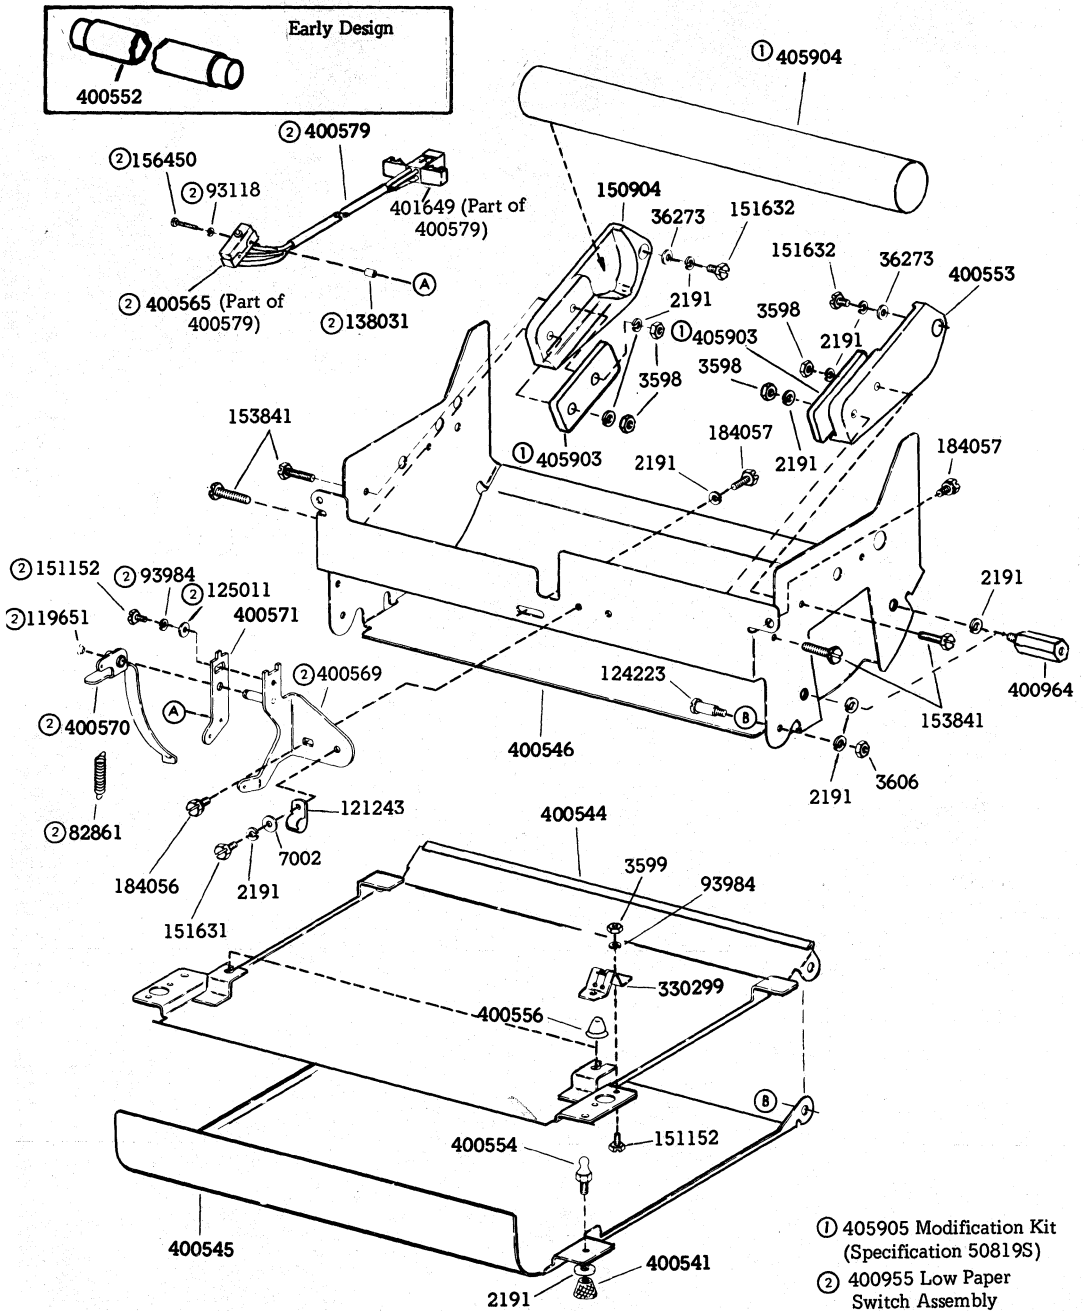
Paper Container Assembly (Friction Feed)
